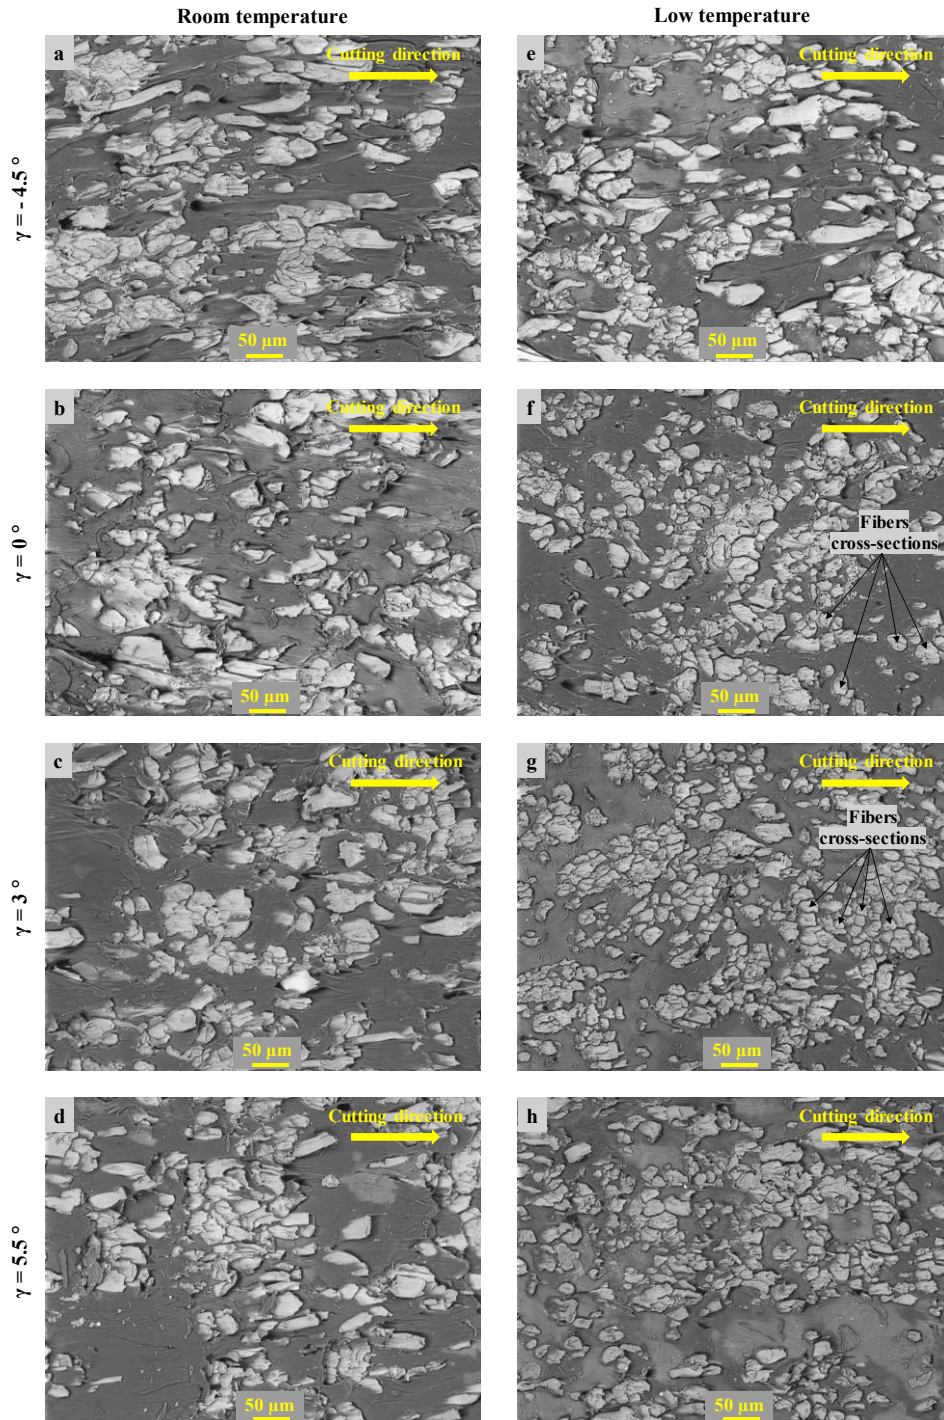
SEM images of machined surfaces showing the fibers cutting behavior of UDF/PP at different cutting conditions
